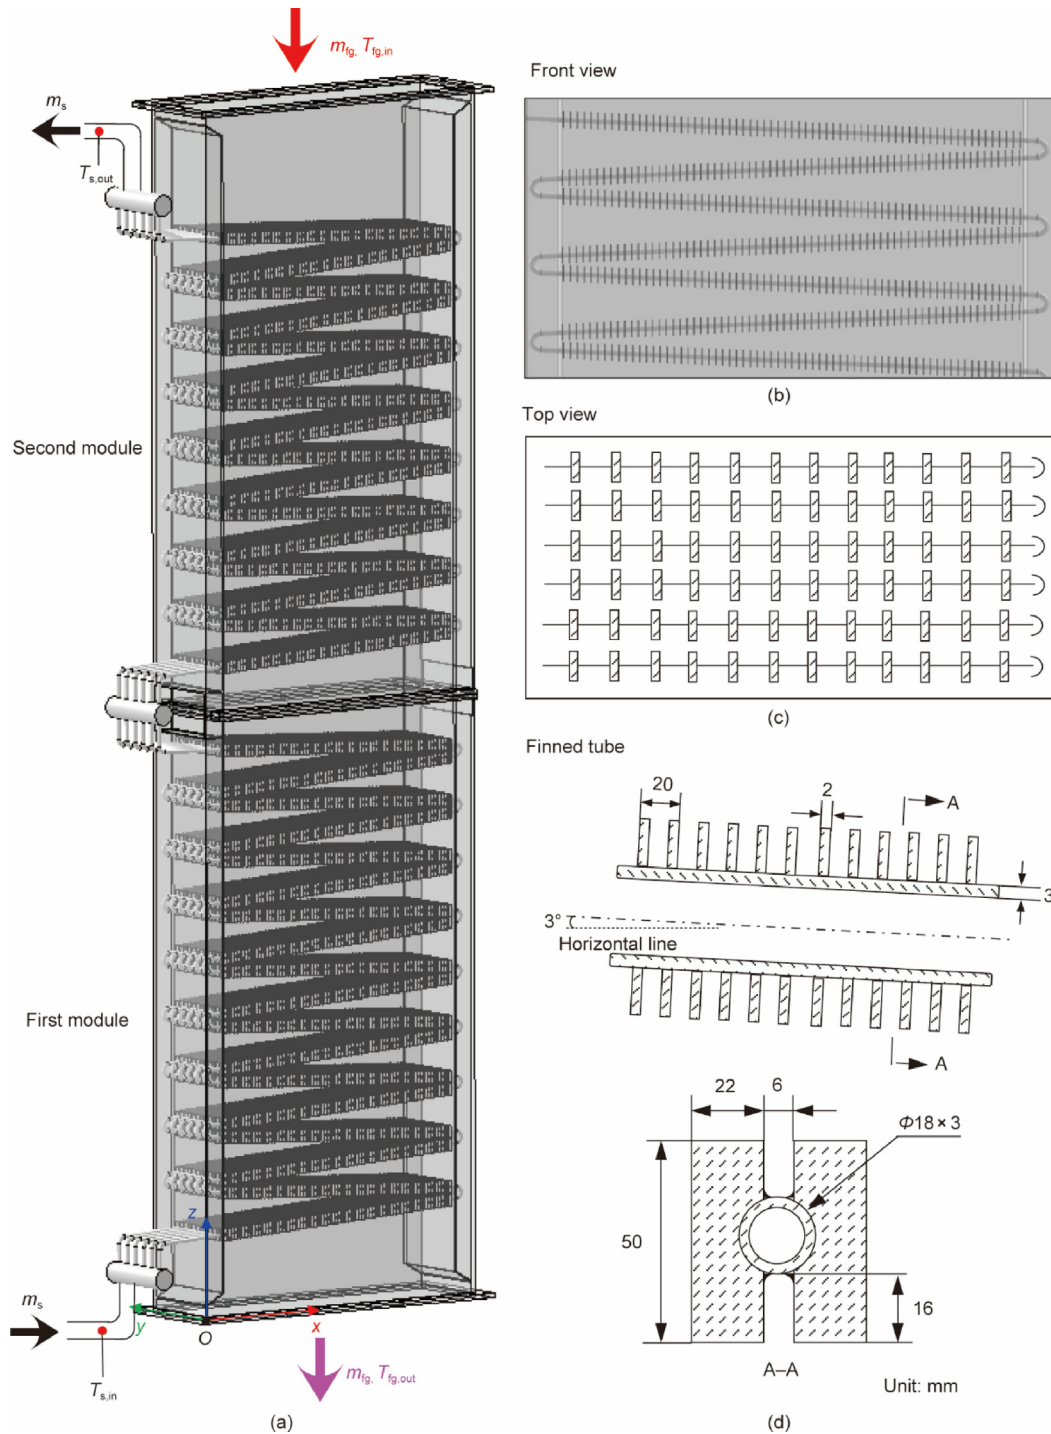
Design of the MSHE. (a) Three-dimensional drawing of the MSHE; (b) front view of the MSHE; (c) top view of the MSHE; (d) the finned tube and geometry dimensions.
